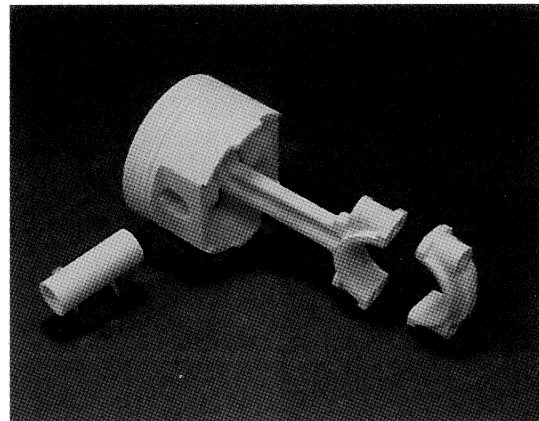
Rapid Prototypes of the Individual Parts of the Piston Assembly
